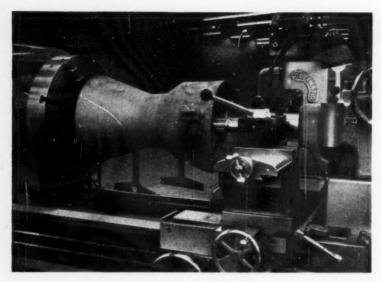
Machining the large-diameter bore of a case assembly on another engine lathe, with the overhanging end supported by an expanding arbor on the tailstock spindle
